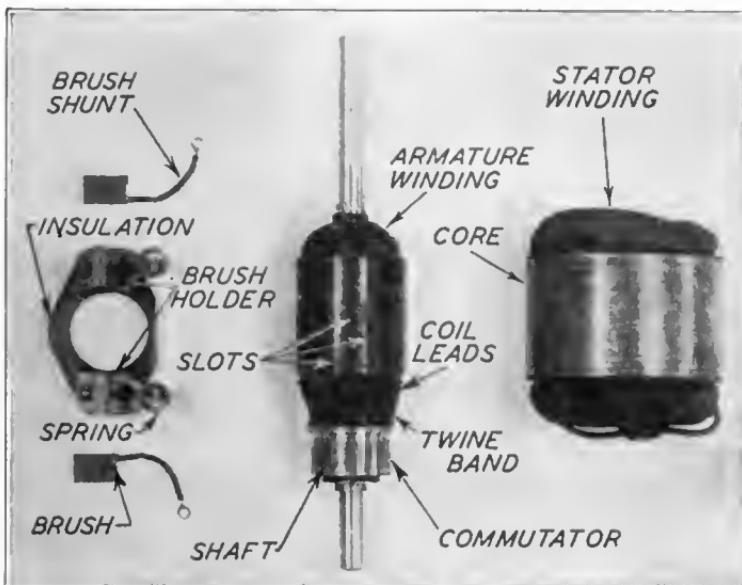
Parts of a Westinghouse Type AD Universal Motor
